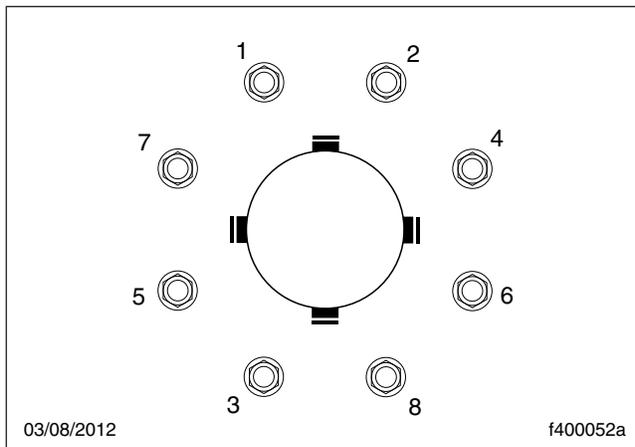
, Tightening Pattern, 8-Hole Wheels
